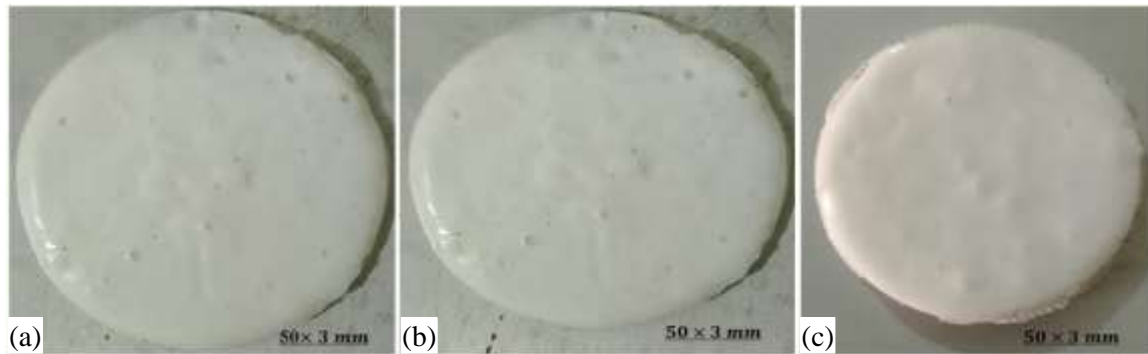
Rectangular infill structures printed using the optimized LSR/TiO<sub>2</sub> (5 wt%) composite ink, (a) Print Speed 240 mm/min with Temp. 40°C and EM = 1.00, (b) Print Speed 390 mm/min with Temp. 60°C and EM = 1.00, (c) Print Speed 540 mm/min with Temp. 80°C and EM = 1.00
